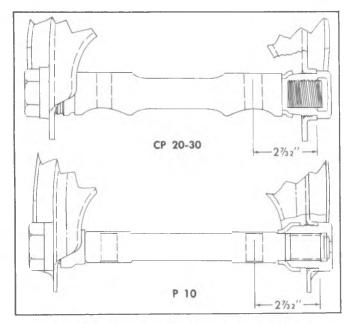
C-19--Positioning U.C.A. Shaft (Steel Bushings)
